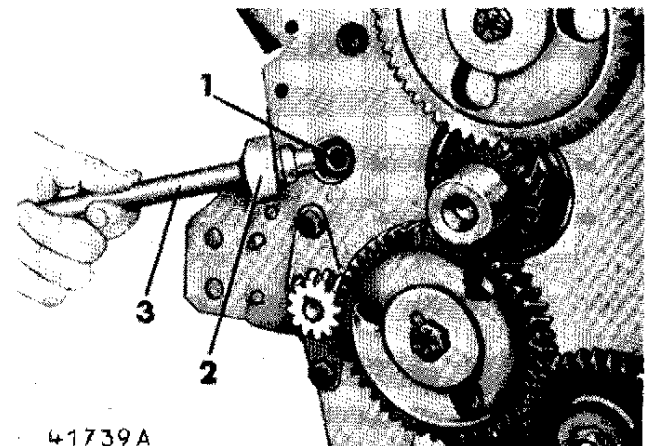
Driving in Valve Seat Bushing of Oil Pressure Regulating Valve
